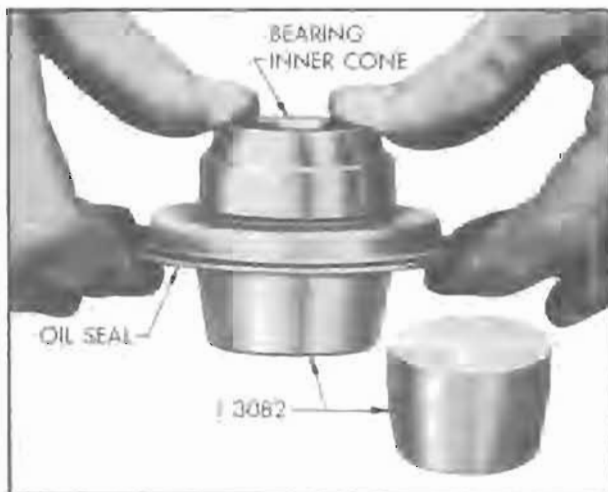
Installing Bearing Cone in Oil Seal with Packing Expander J 3082
